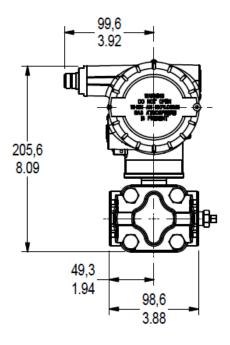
Dual Head, typical mounting dimensions for STAW740 (remote adaptor shown)
